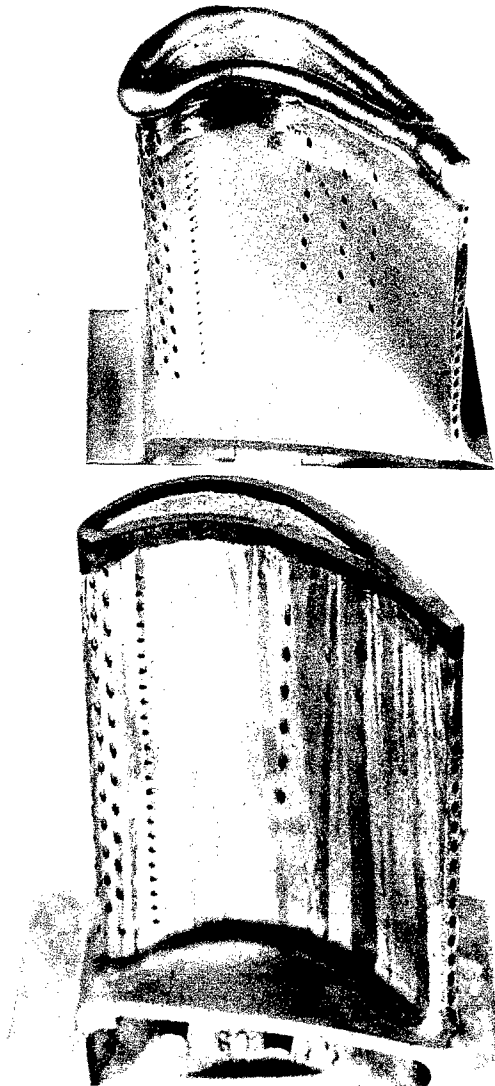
Tip repair of an HPT blade manufactured from a DS superalloy by vision-assisted automated plasma arc welding with an oxidation resistant nickel-based filler alloy. (Top: As - welded, Bottom: After machining and heat treatment)
